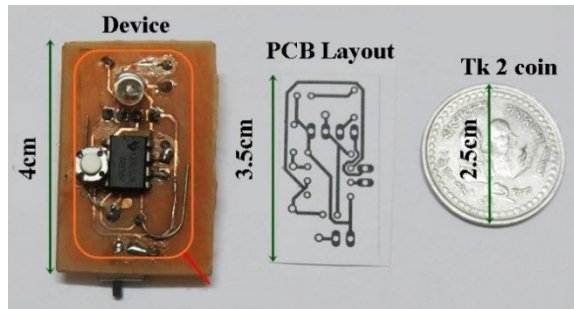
Implemented device (left), PCB layout (center) and local coin (right)
